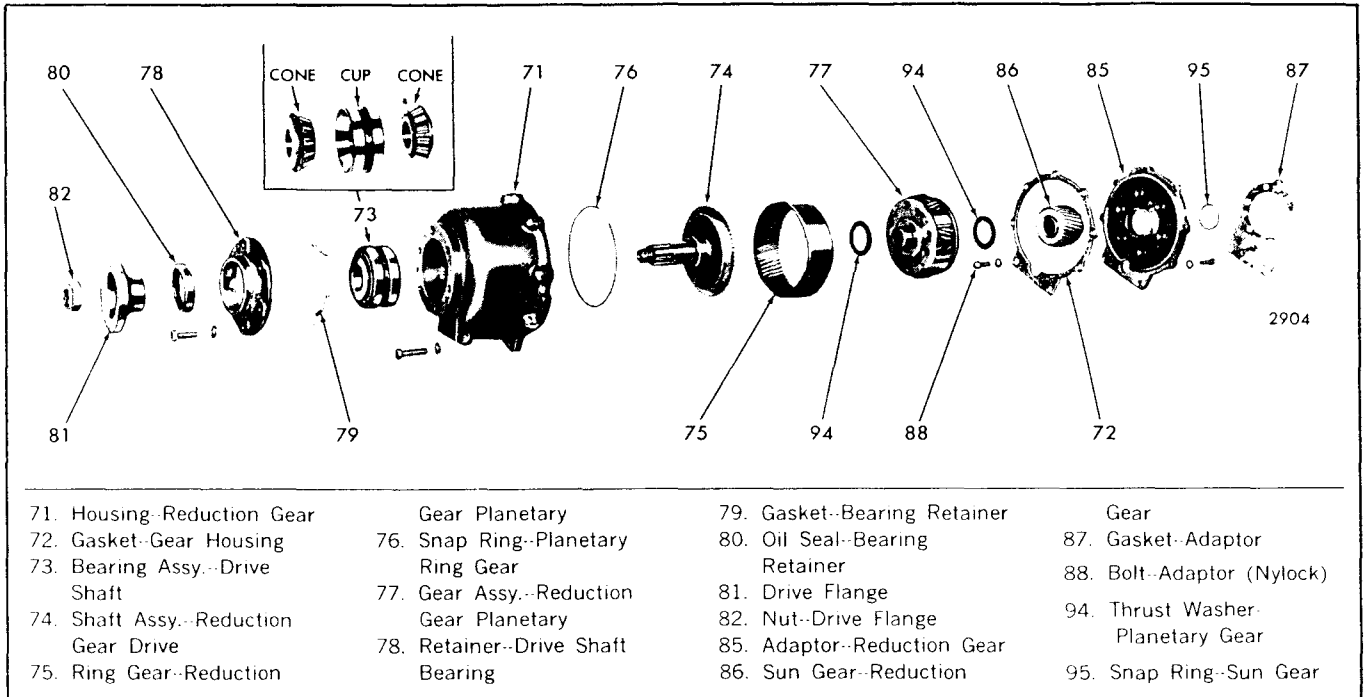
Reduction Gear Details and Relative Location of Parts (2.1:1 Ratio)
